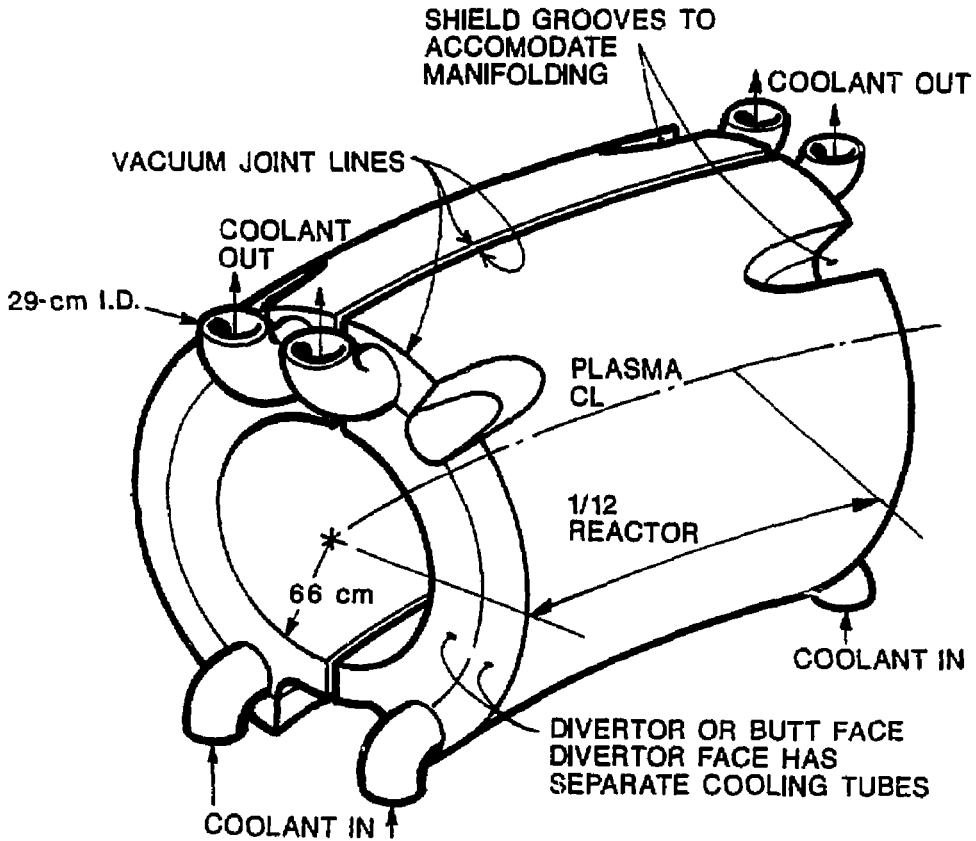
Isometric view of a TITAN-II blanket module.
